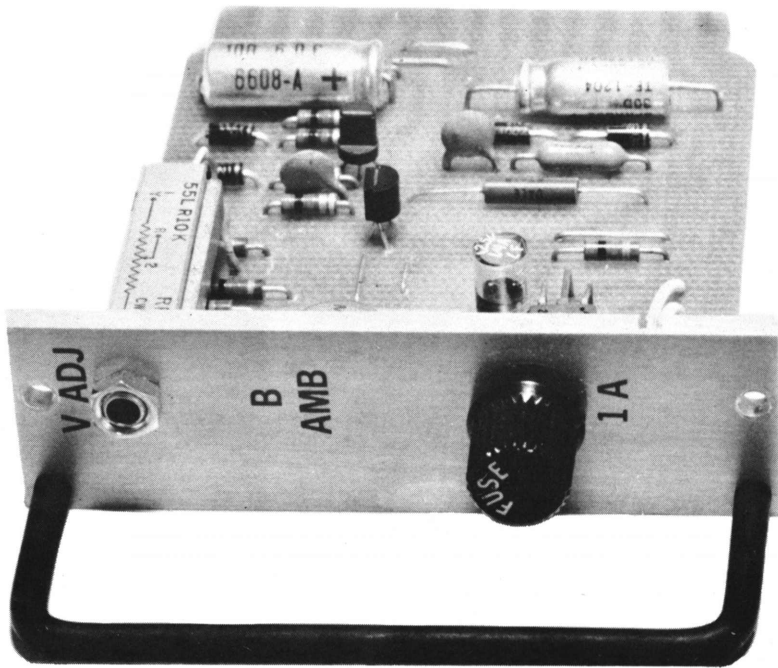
Voltage regulator card with Fig. 13 panel and heatsink, and handle.
